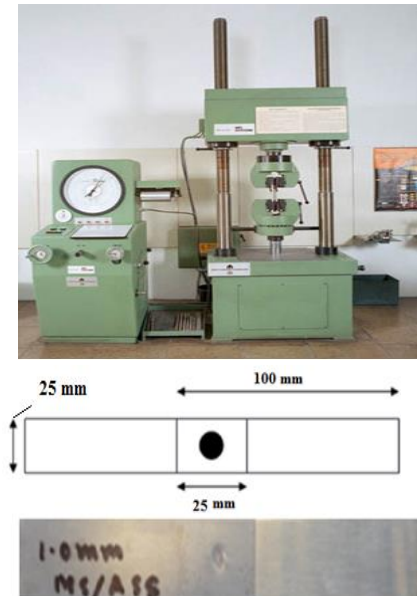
Universal Tensile Strength (UTS) Machine and Specimen
